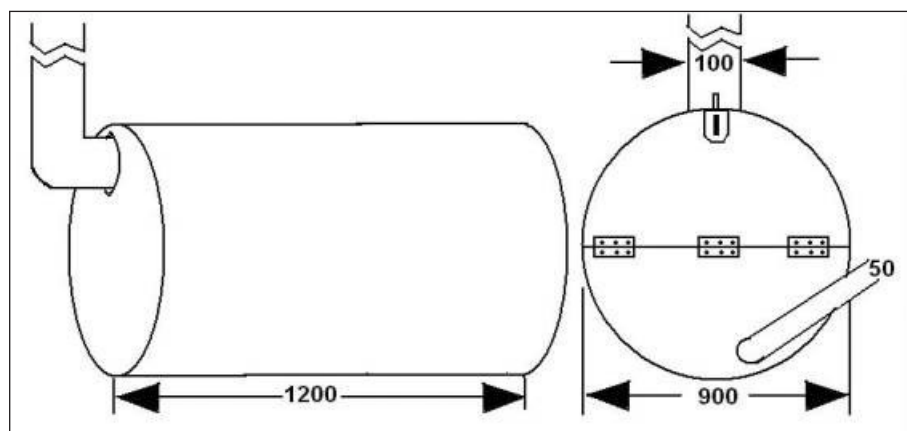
Schematic drawing of charring kiln for agricultural residues (dimensions in mm)
